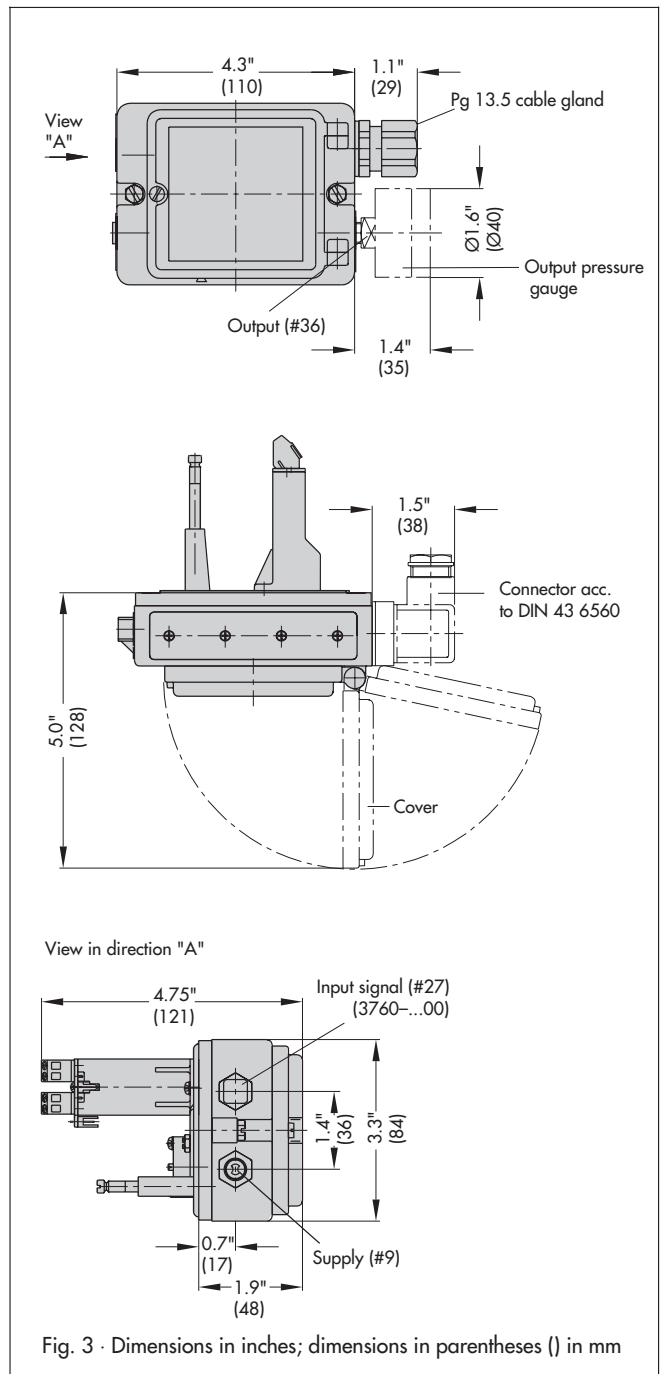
· Dimensions in inches; dimensions in parentheses () in mm
